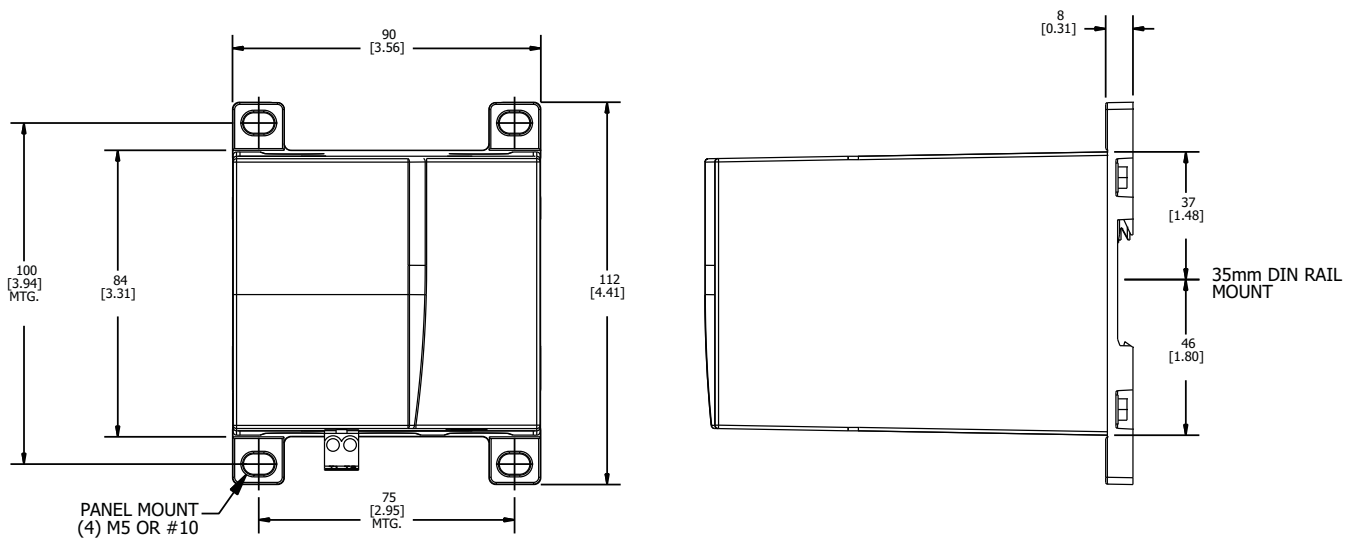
Measurement Module C445MB... Mounting Dimensions
